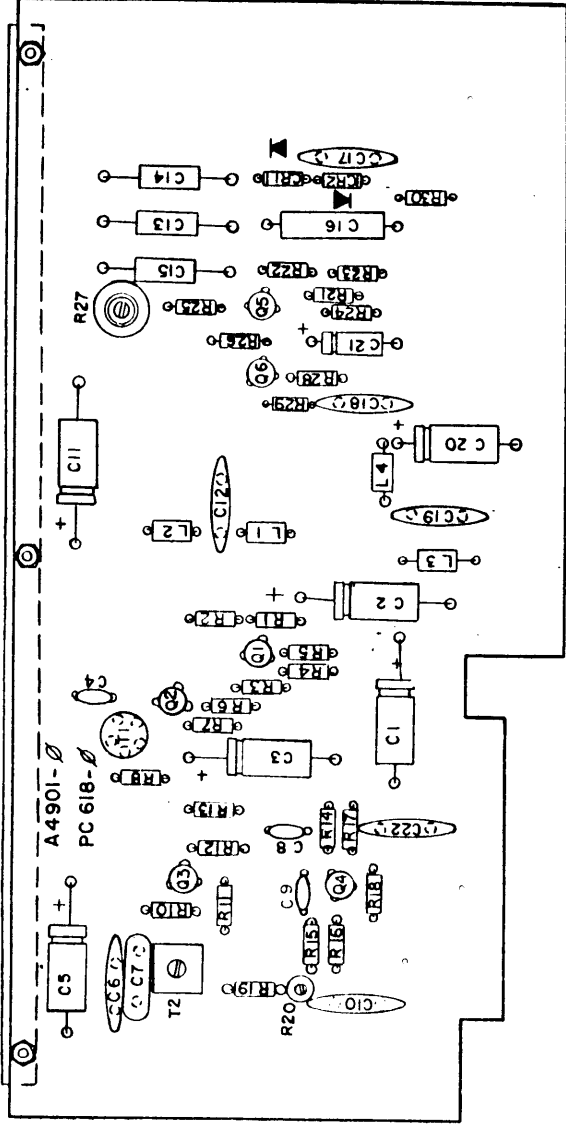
COMPONENT LOCATION AND PARTS LIST.
